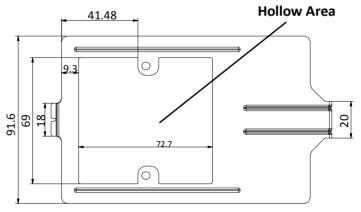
Dimensions of Installation Plate (DS-KV8102-XP)
